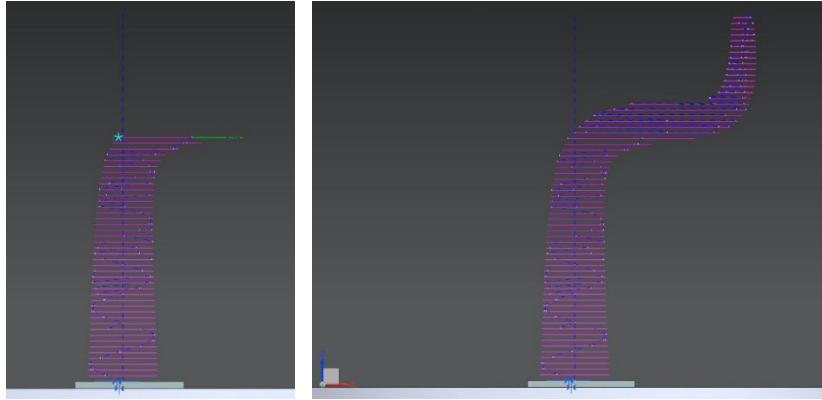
(a) printing of the horn in progress; (b) the overall toolpath for the printing of the horn.
